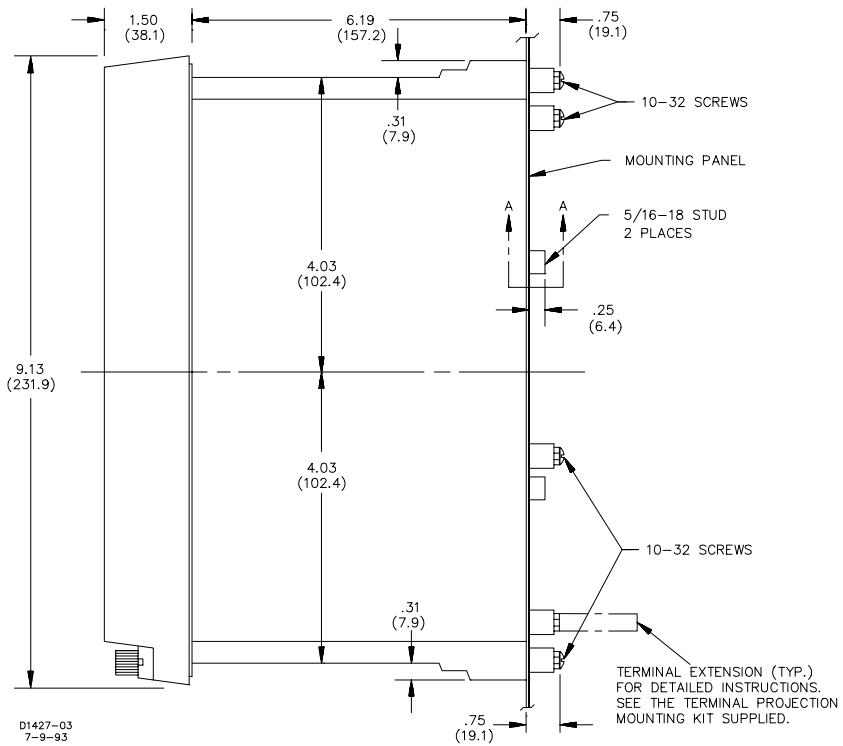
S1 Case, Double-Ended, Projection Mounting, Outline Dimensions, Side View
